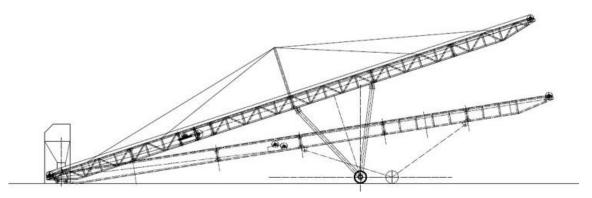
Lifting height may be changed to meet individual requirements. ("Portable Belt Conveyor, Moveable Belt Conveyor, Mobile Conveyor —Henan Excellent Machinery Co., Ltd.," 2018)
